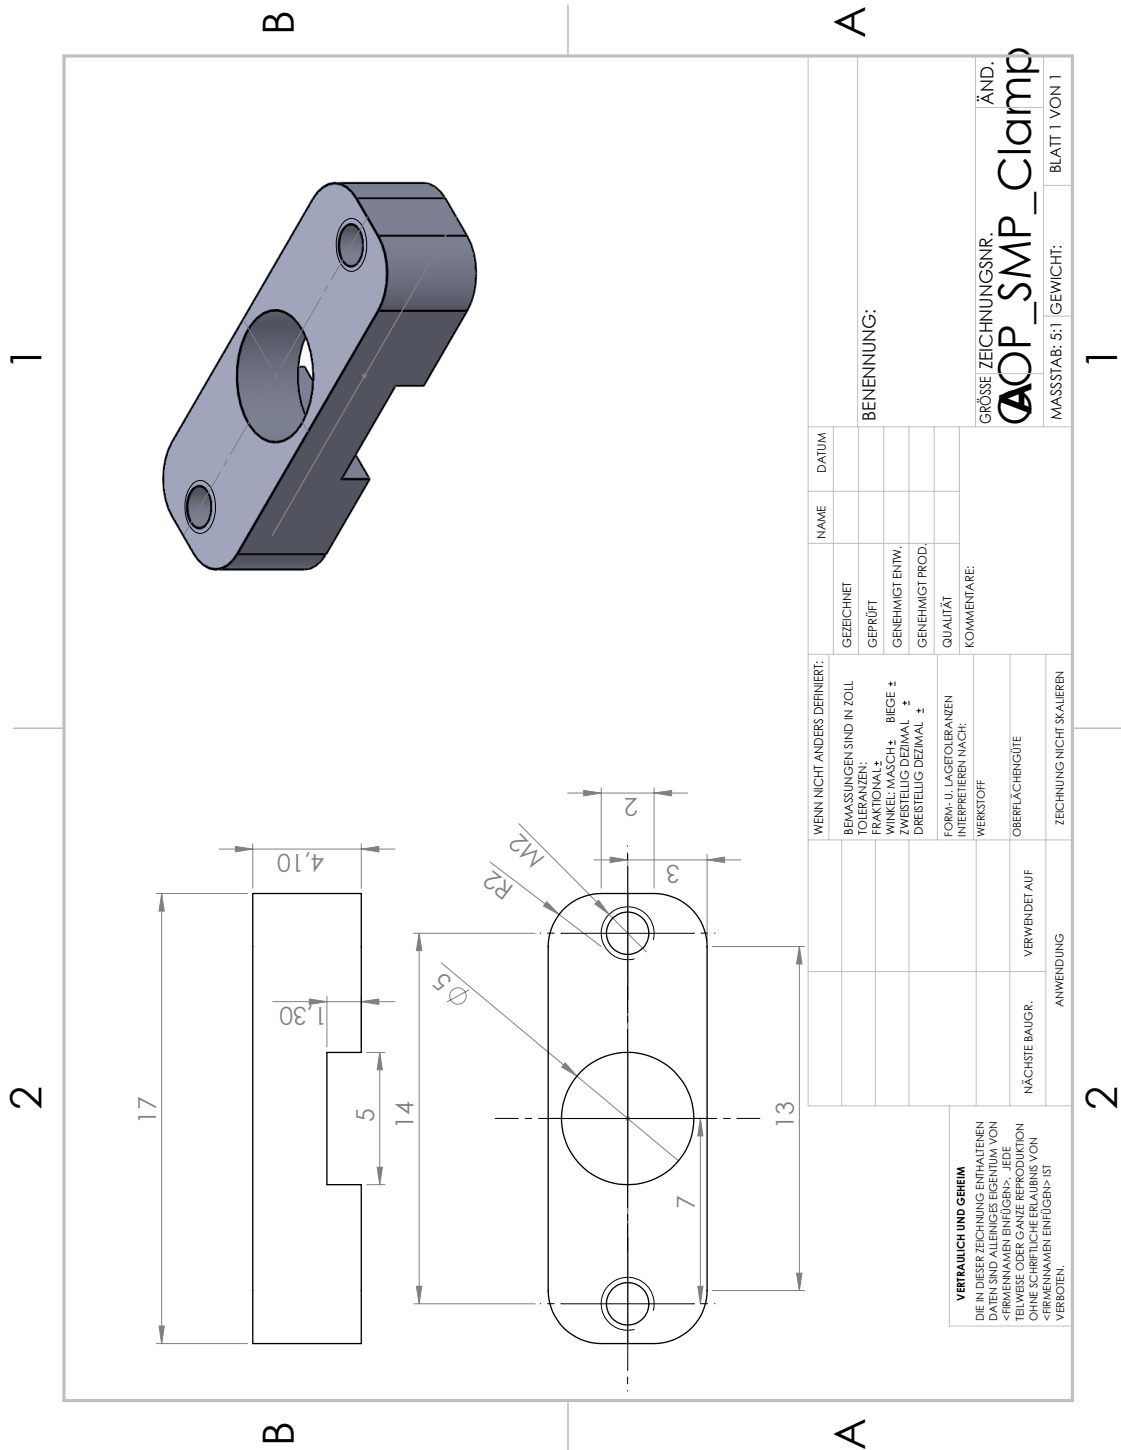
Dimensions of the piece to clamp, i.e. fix the position of the SMP connectors and remove additional stress on the soldering connections.
